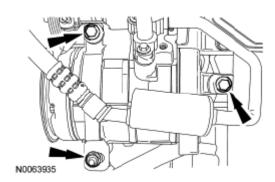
Locating A/C Compressor Bolts And Nut Courtesy of FORD MOTOR CO.
